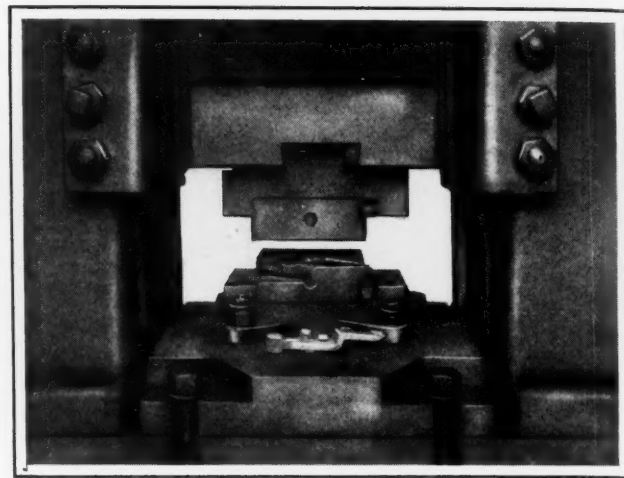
Dies Employed in Coining the Bracket Shown in Fig. 2
